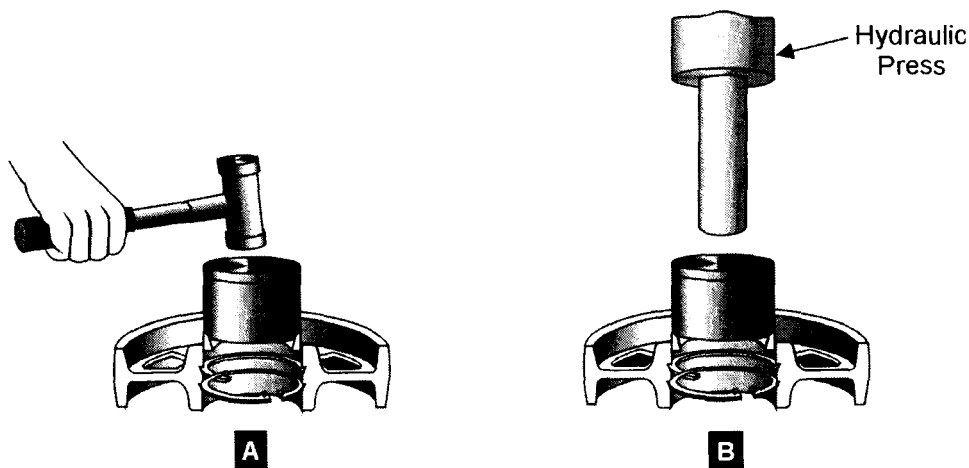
Installing tapered roller bearing cups. (Courtesy SKF Canada Limited)
